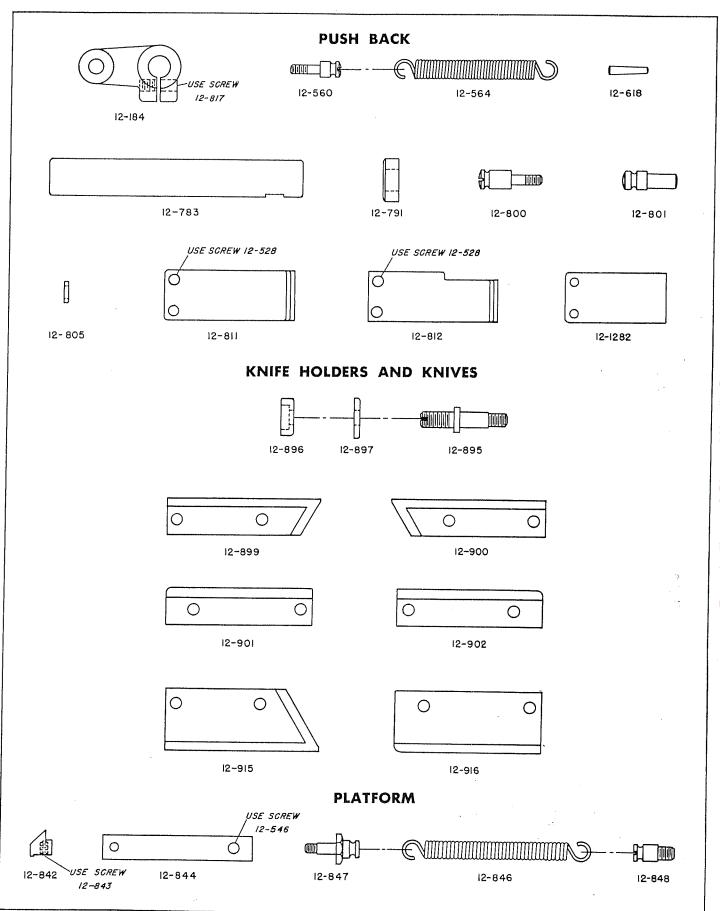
Push Back, Knife Holder and Knife, and Platform Parts (approximately ½ size)
